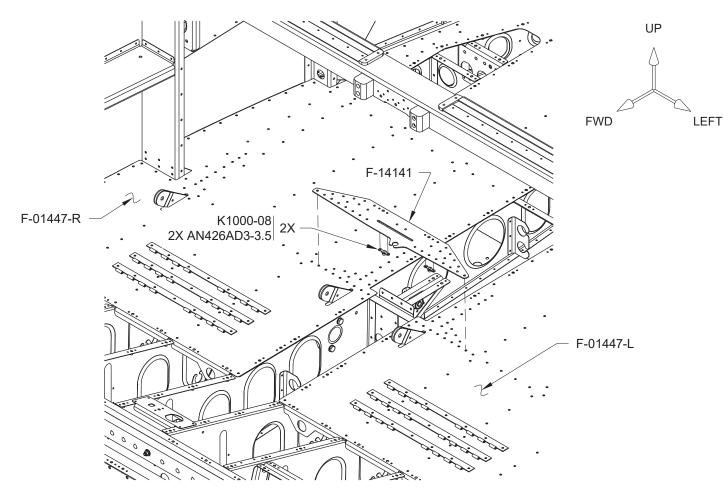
INSTALL BAGGAGE FLOOR SPLICE
